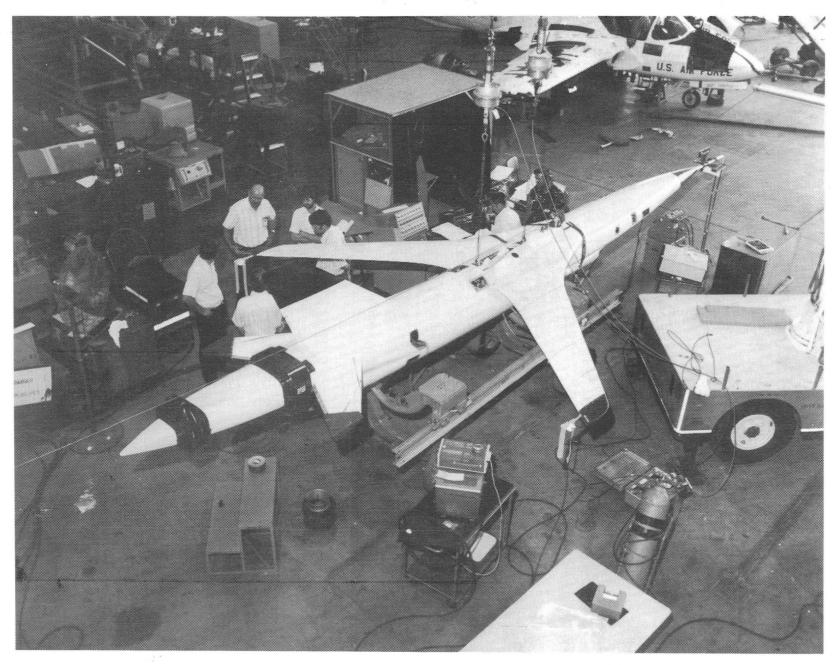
Photograph of the aircraft and wing during assembly checkout.
